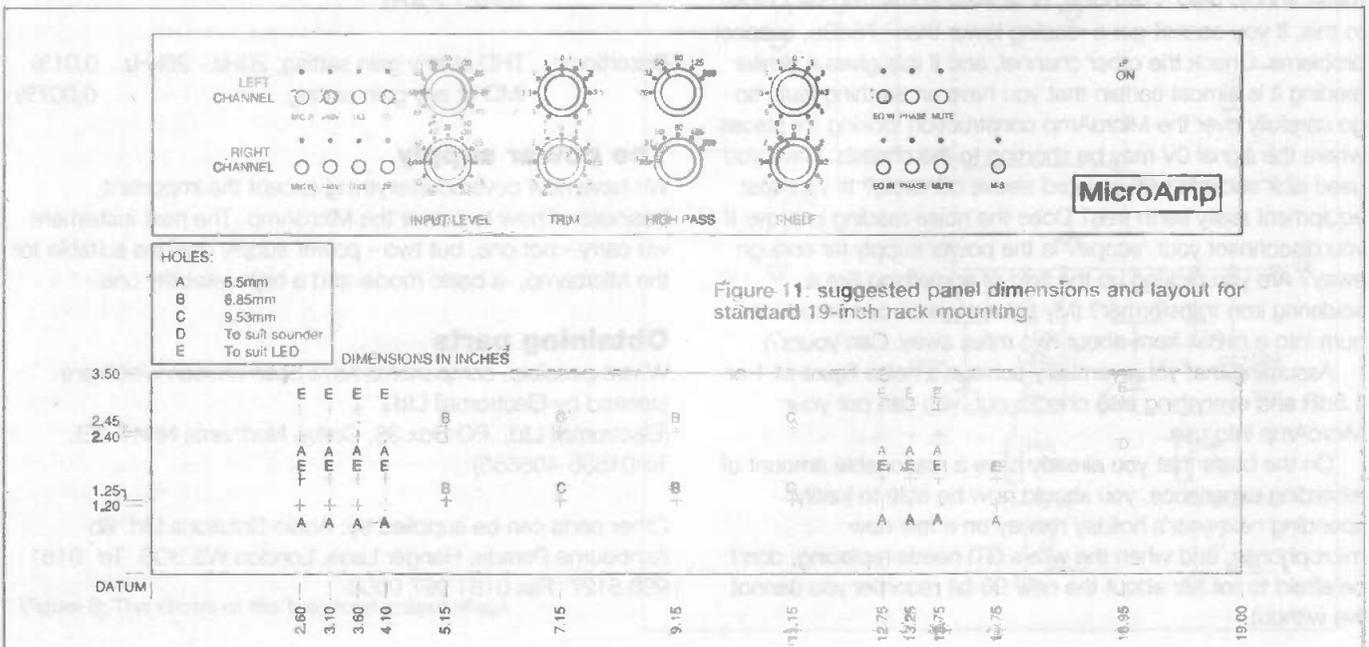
suggested panel dimensions and layout for standard 19-inch rack mounting.
